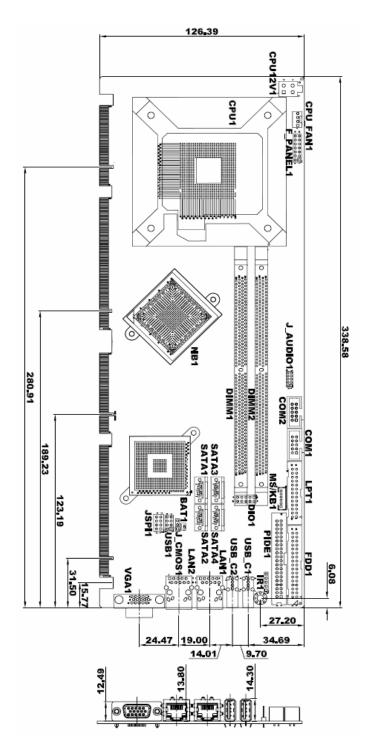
PCIE-G41A2 Dimensions (mm)
